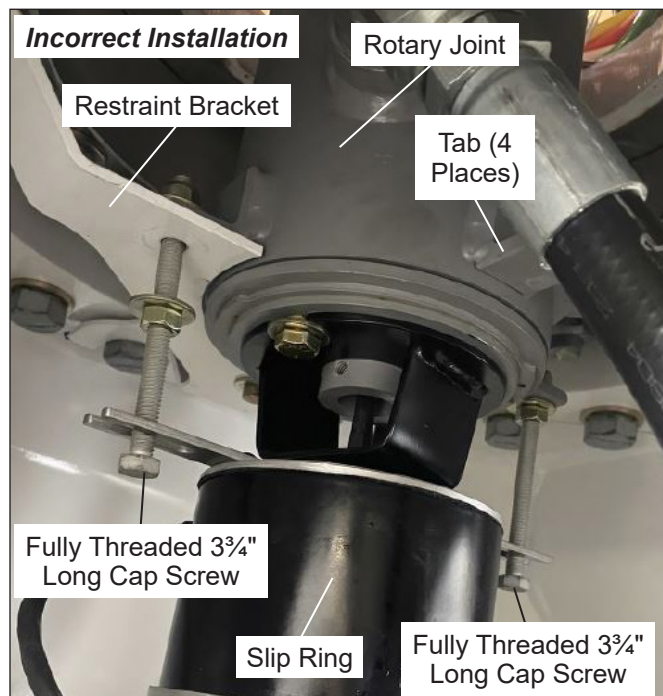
Fully Threaded 3¾" Long Cap Screw(s)
